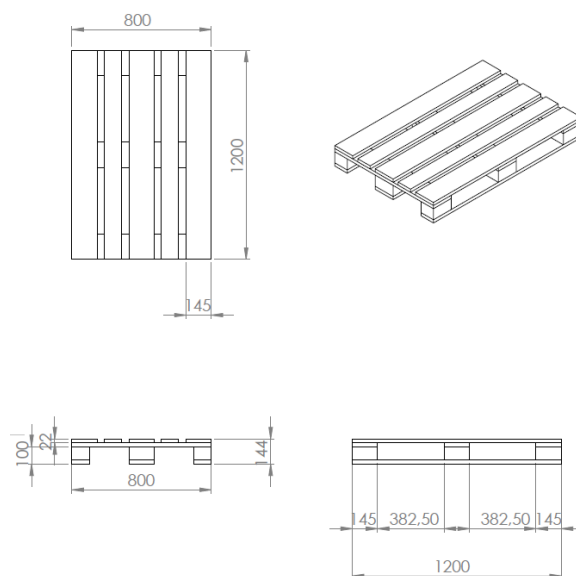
Dimensions of the pallet used in the assays, in millimeters.
